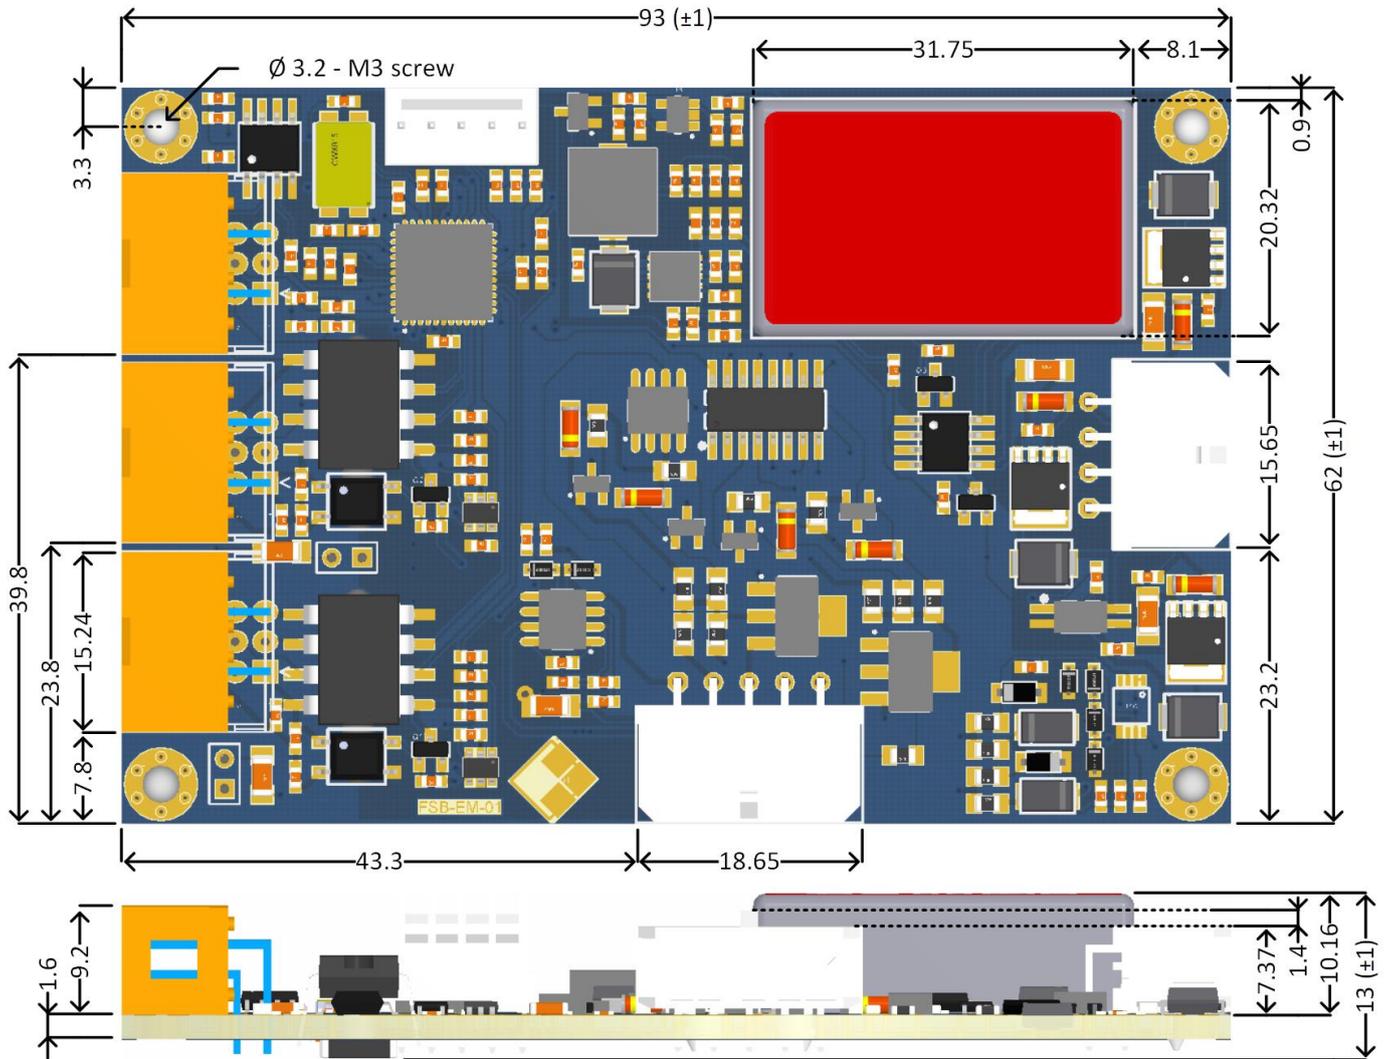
Mechanical views (top and side views) of FSB-PR. Wire-to-board connector version. All dimensions are in mm.
